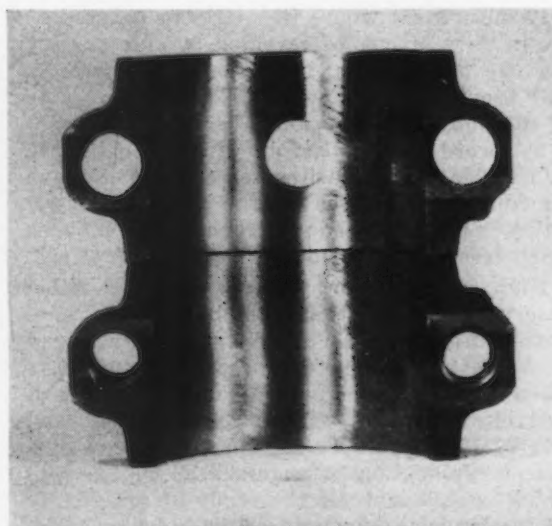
The fractured faces of the cap and rod make perfect mating surfaces when reassembled.
